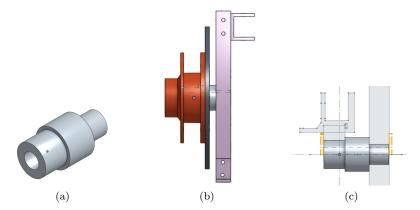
Views of axle. (a) axle in isometric view (b) Right view of axle assembly with the hub, brake disc, and upright mounted (c) Sketch includes the axle, sketch of the hub, and sketch of the upright. The yellow highlighted parts are locations of washers. The dark grey dotted line shows the hole which a bolt fits through.
